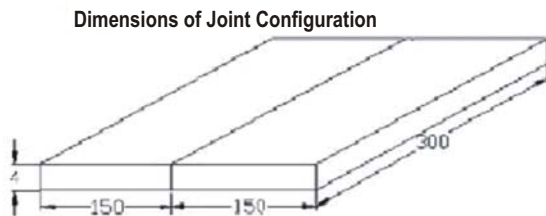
Scheme of welding with respect to rolling direction and extraction of tensile specimen.
